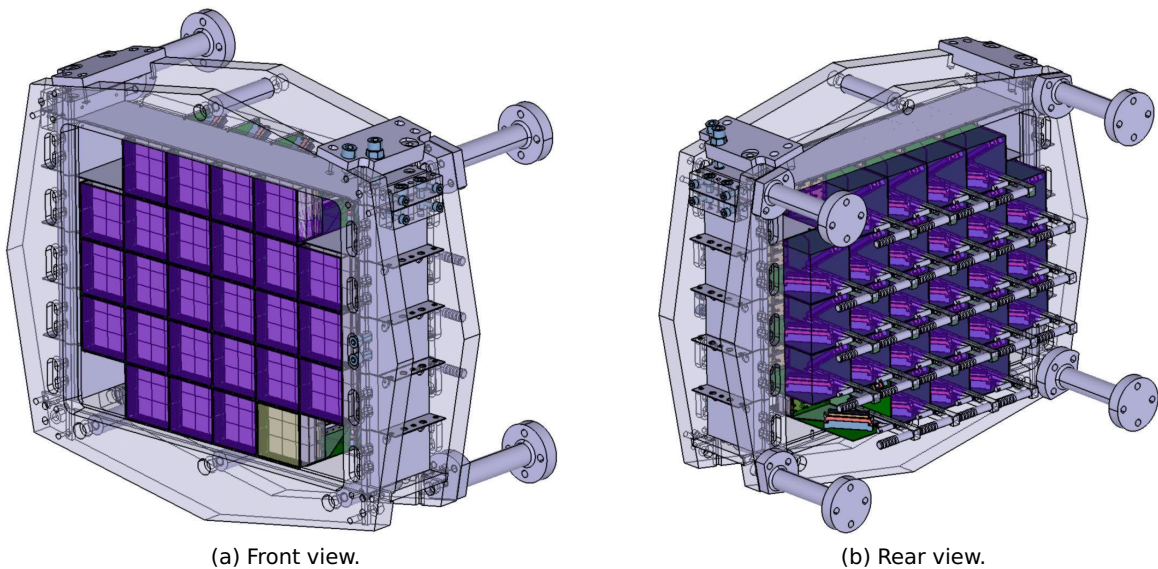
Technical drawing of the holding structure equipped with detector modules.
